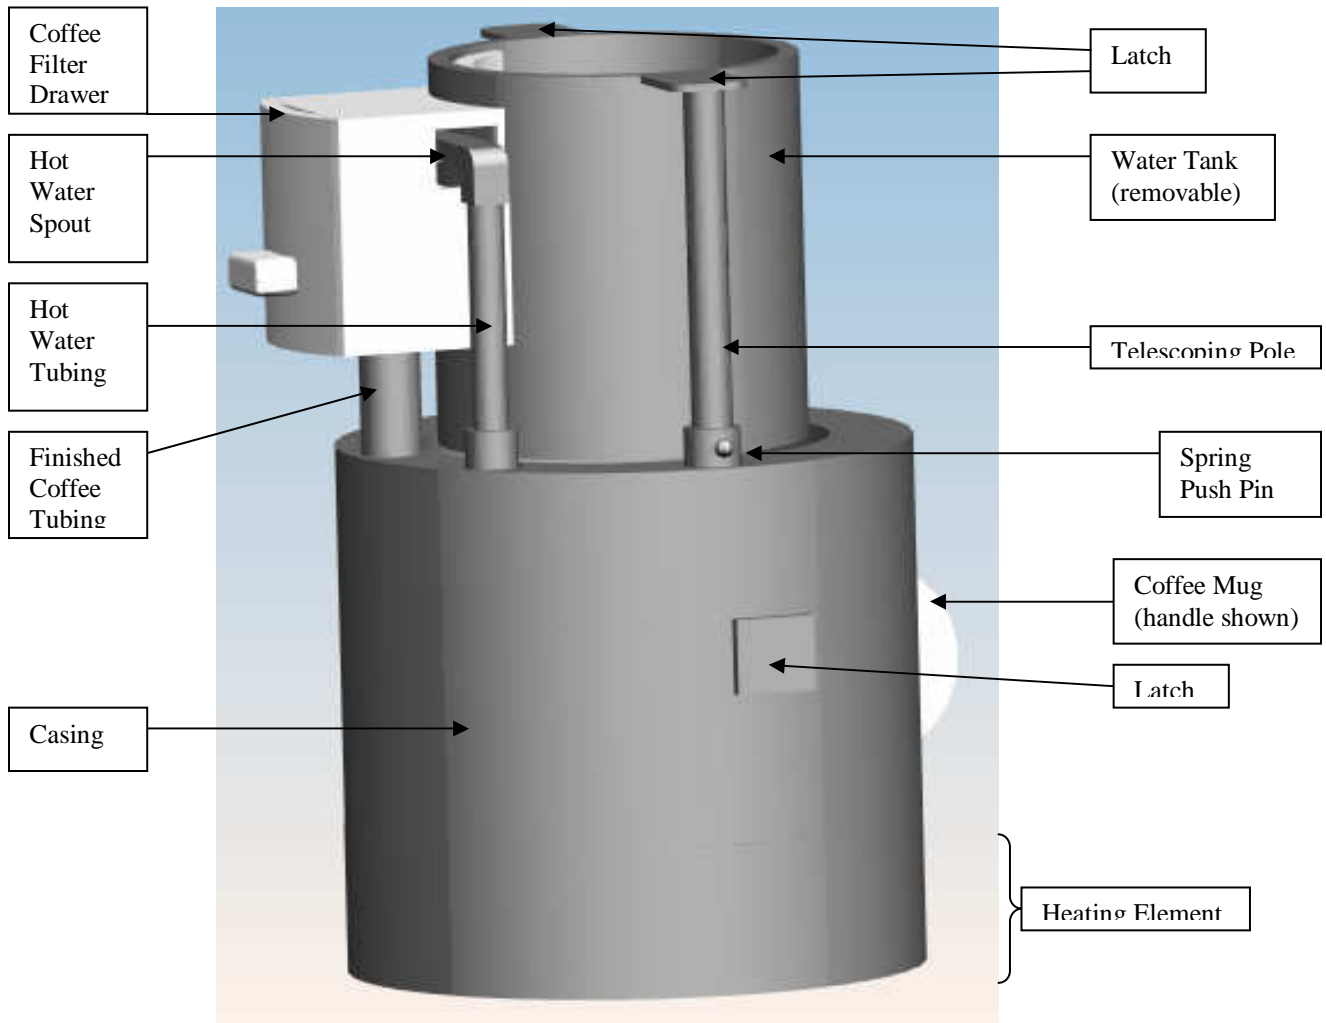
External CAD Drawing for Selected Concept #2: Enclosed Cup
